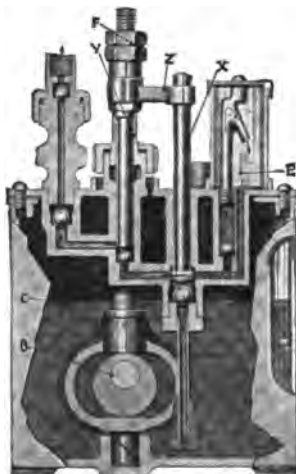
SEC. 10nn.—Sectional view of McCord forced-feed lubricator.
